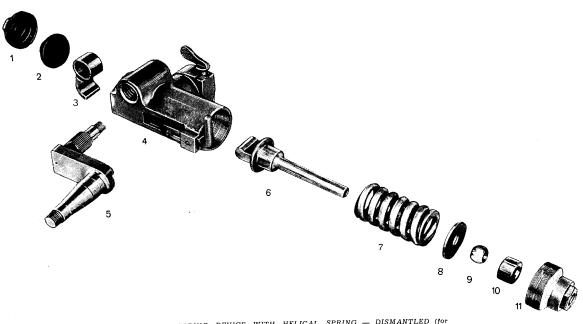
SPRING DEVICE WITH HELICAL SPRING — DISMANTLED (for weapons BIA2, BIA3 and BIA4)
